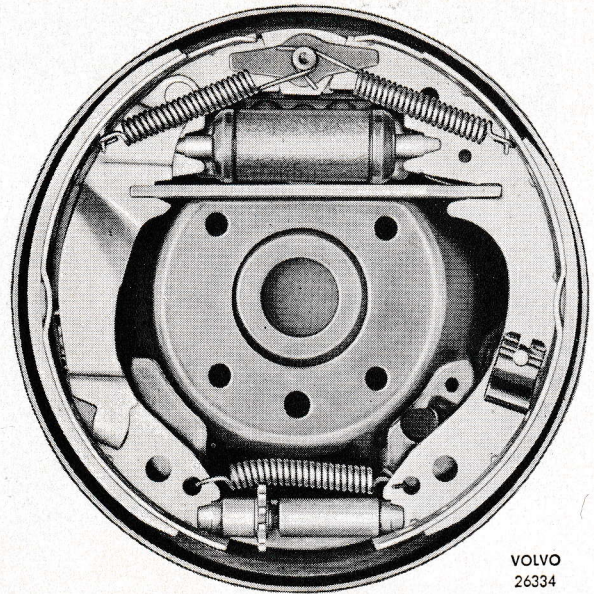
Wheel brake unit, late production, right-hand rear wheel.
